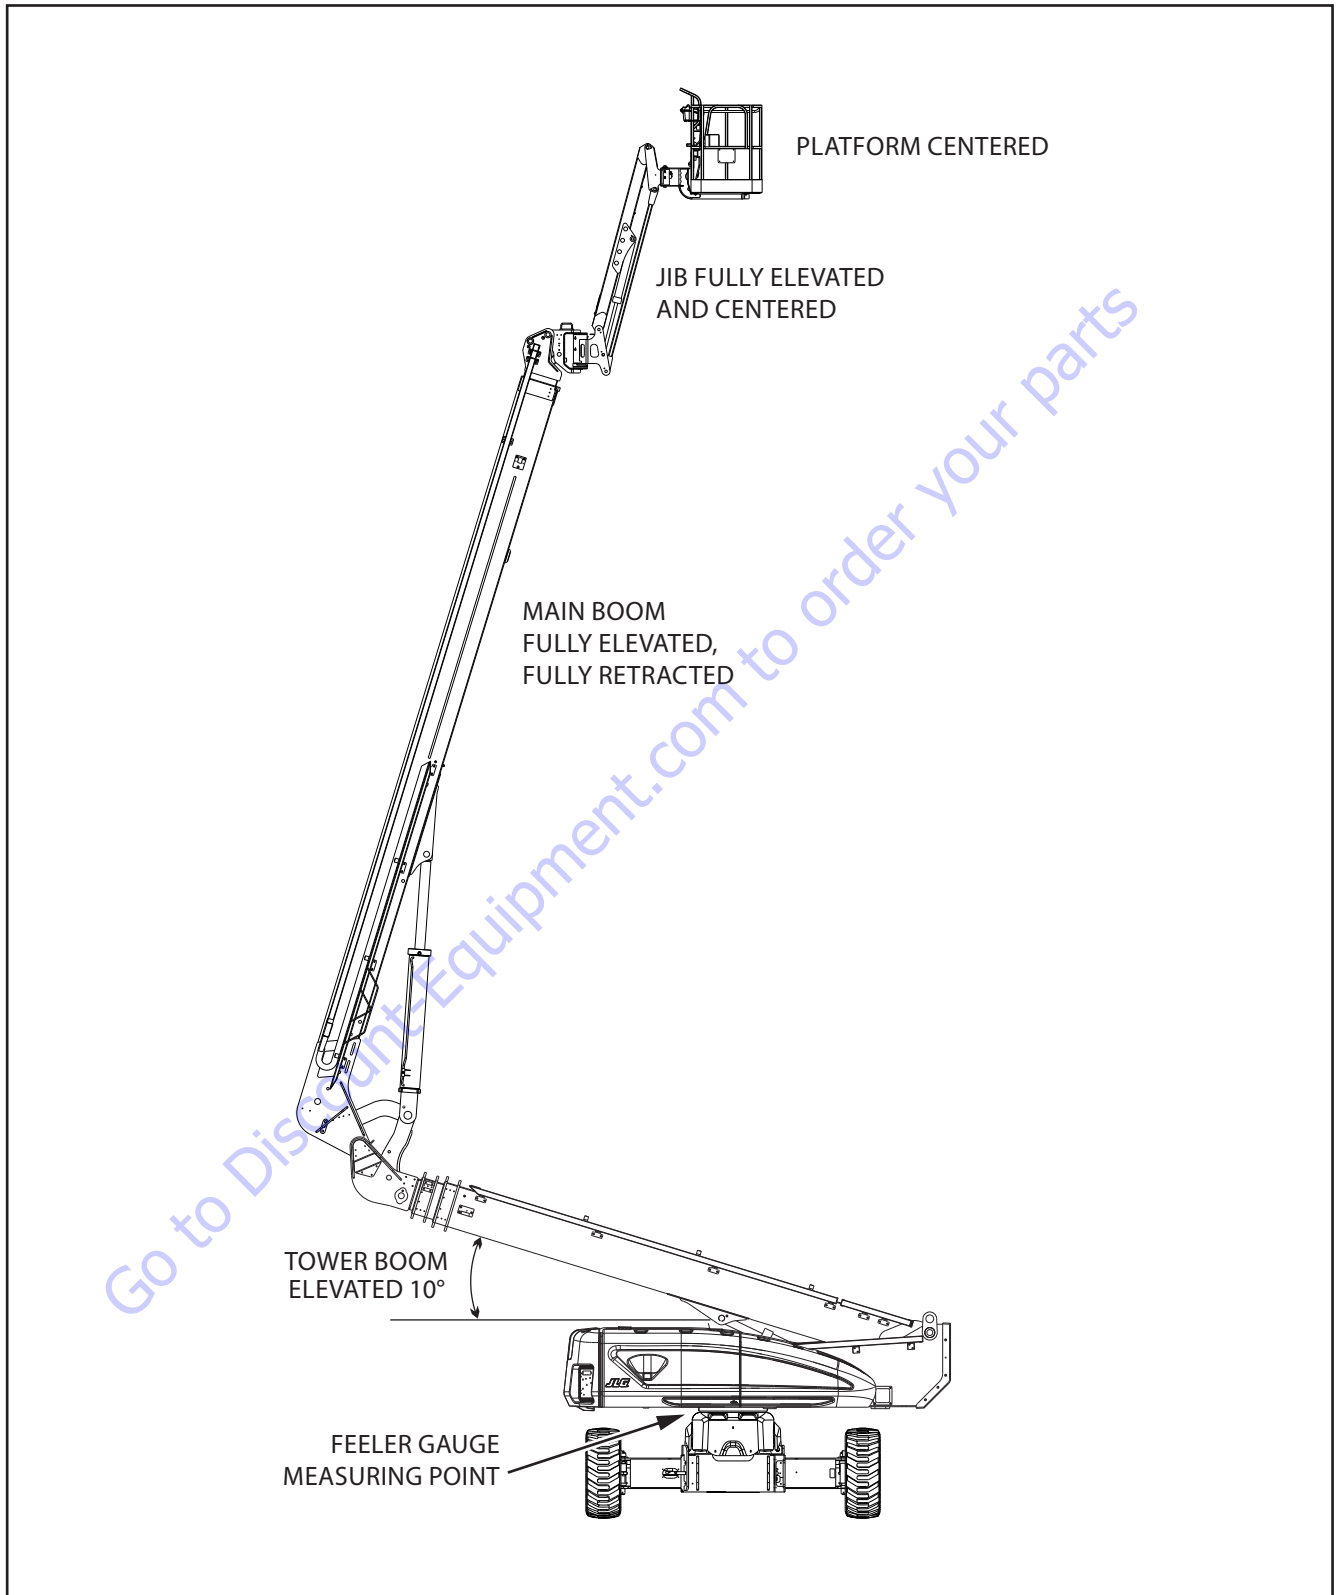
Turntable Bearing Service Boom Placement - 2
